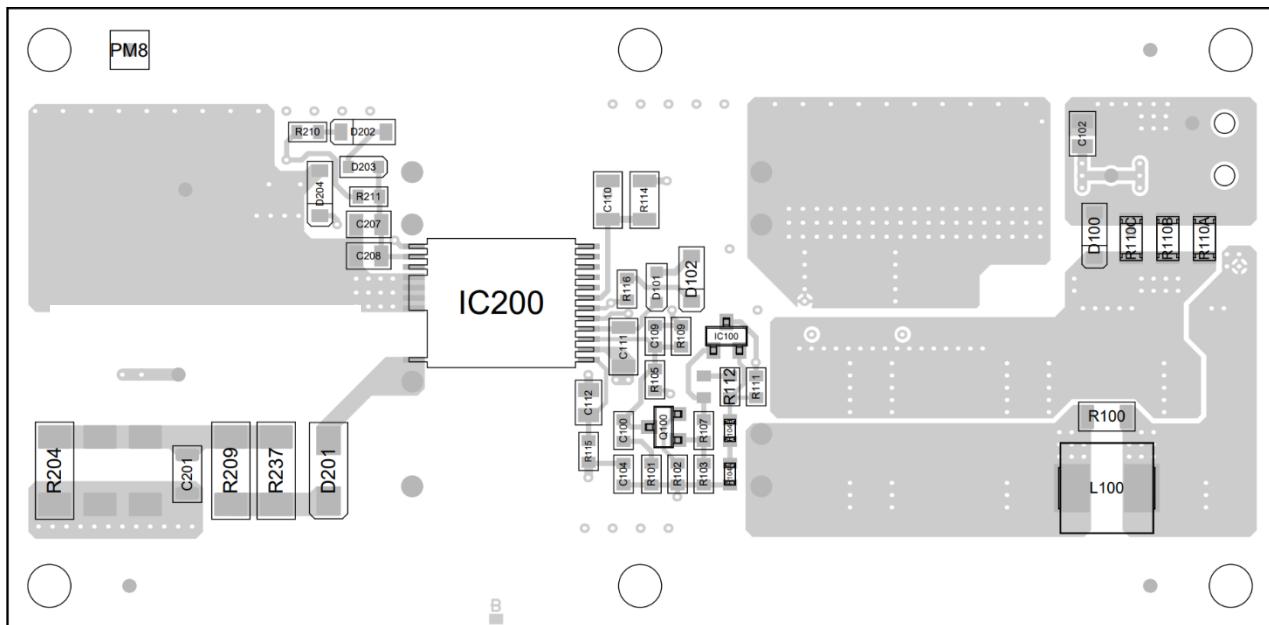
DER-1035Q PCB Assembly (Bottom).
